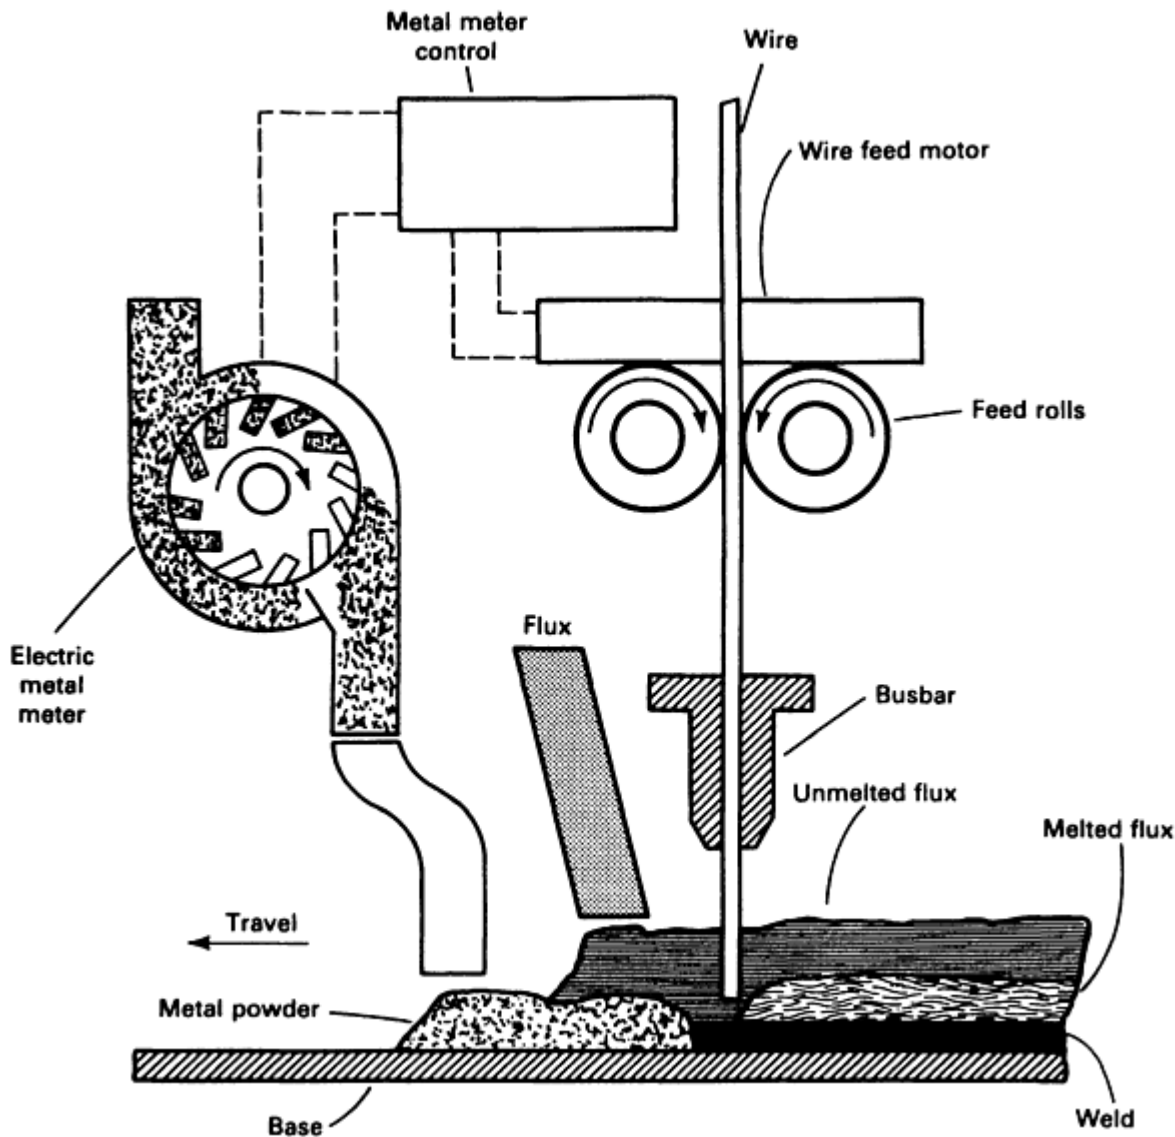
Schematic of the bulk-welding process using metal powder joint fill
